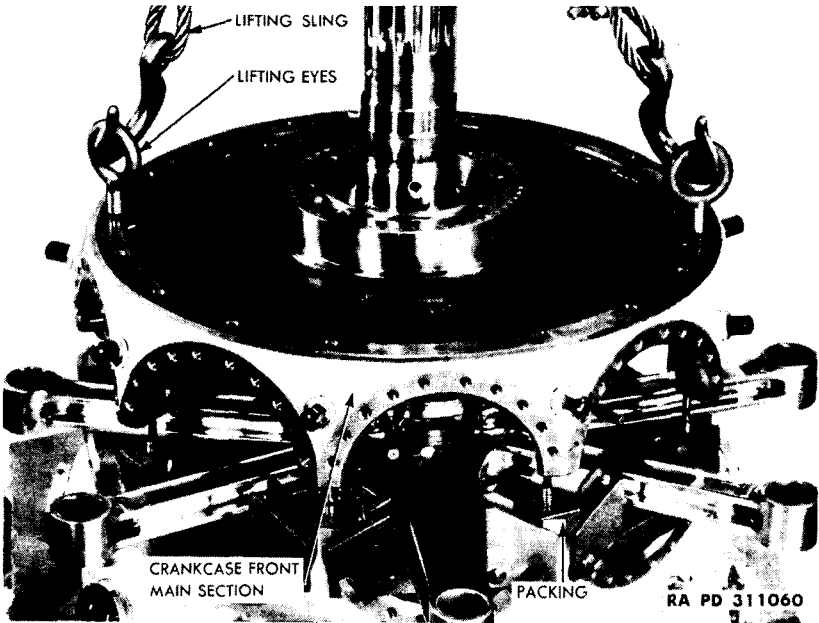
Removing Crankcase Main Front Section, Using Sling 5A2228 and Eyes 5A2318
